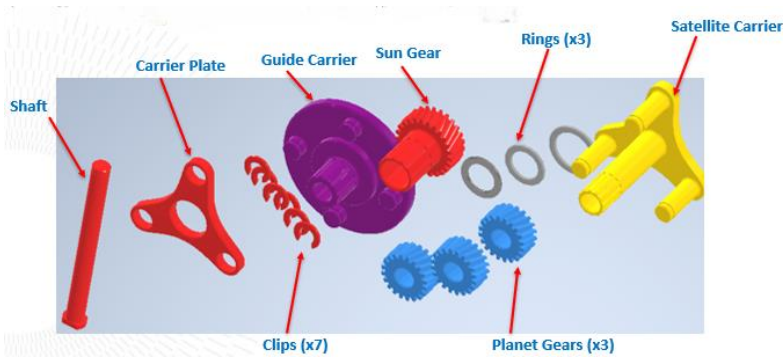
Explode view of designed planetary gearbox in Autodesk 3ds Max
